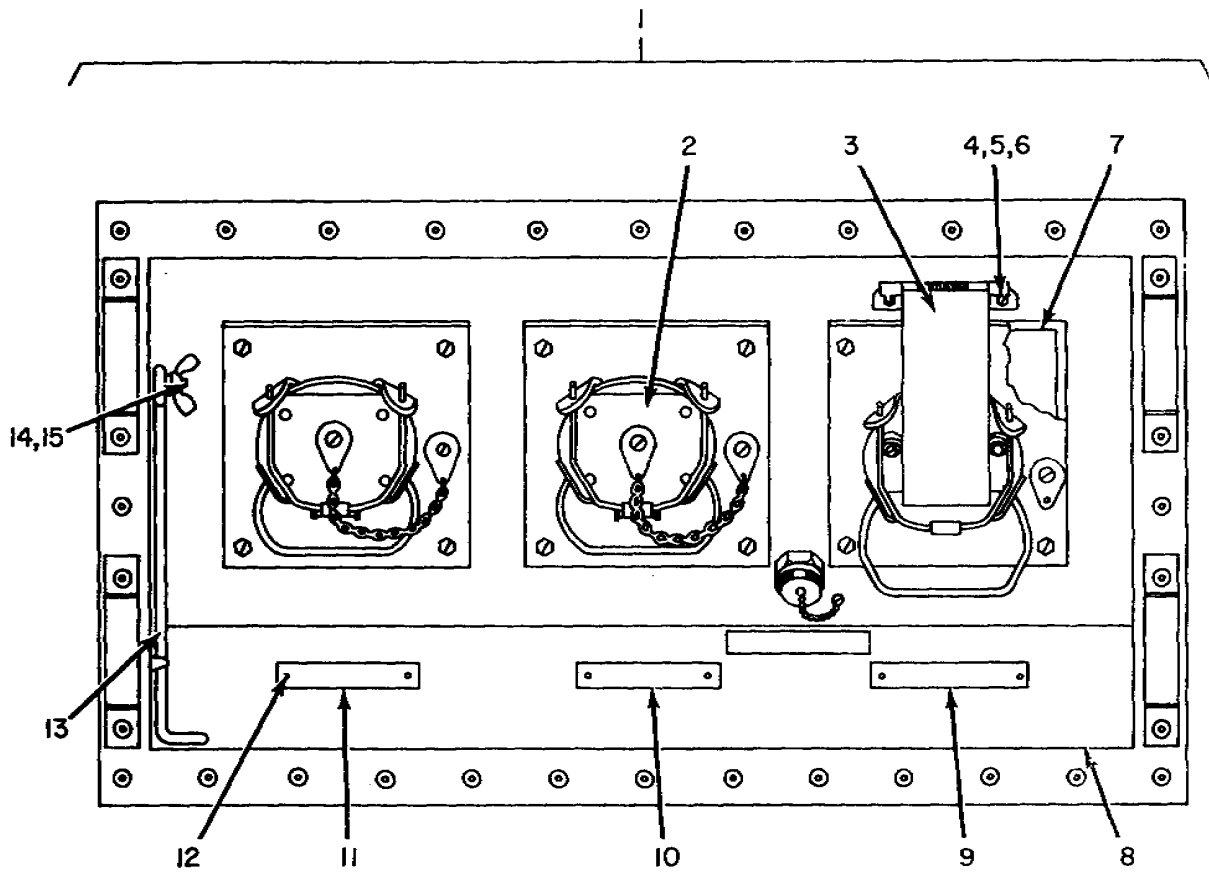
Shelter, Electrical Equipment S-336/TRC-112 Power Entrance Box Assembly.
